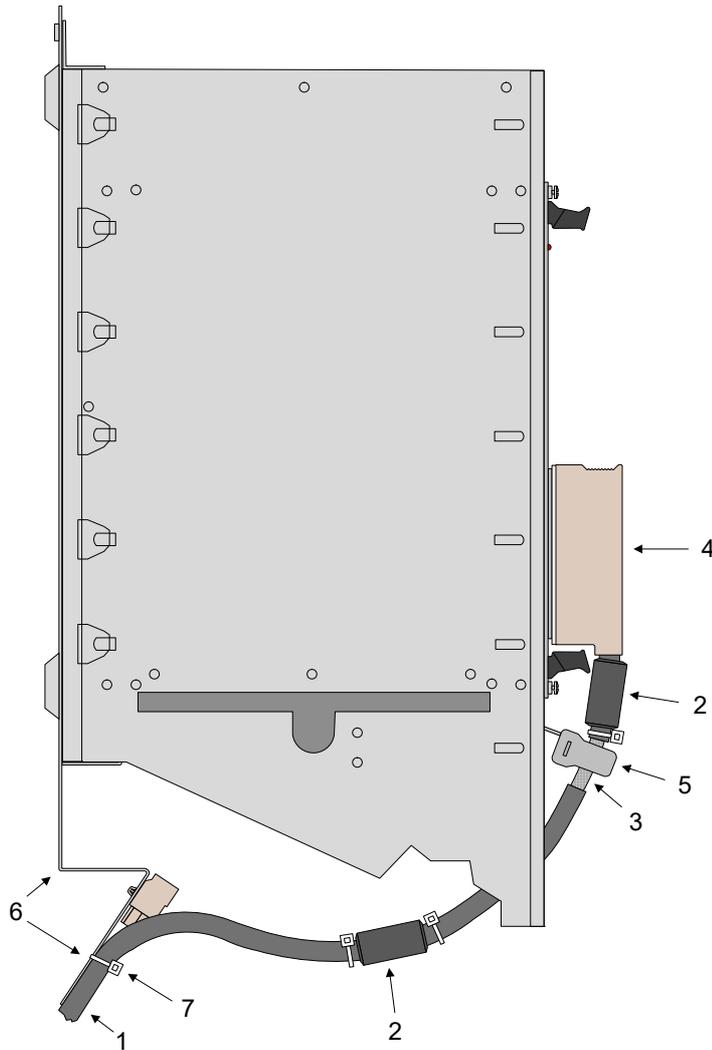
FOX612 and cable installation with EMC-filter on wall-mounting adapter
